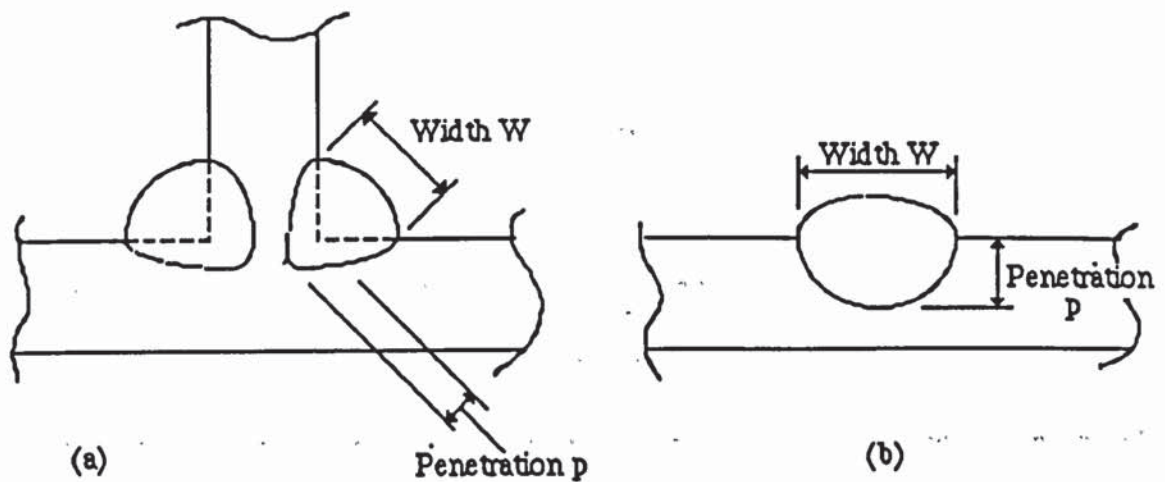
(a) Fillet weld profile, (b) Butt weld profile.
